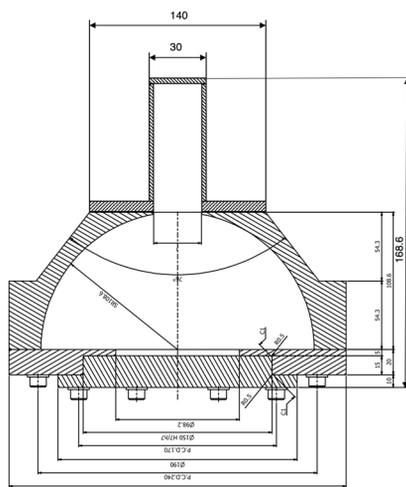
Cross-sectional drawing of mushroom-shaped Aluminum test cavity.
